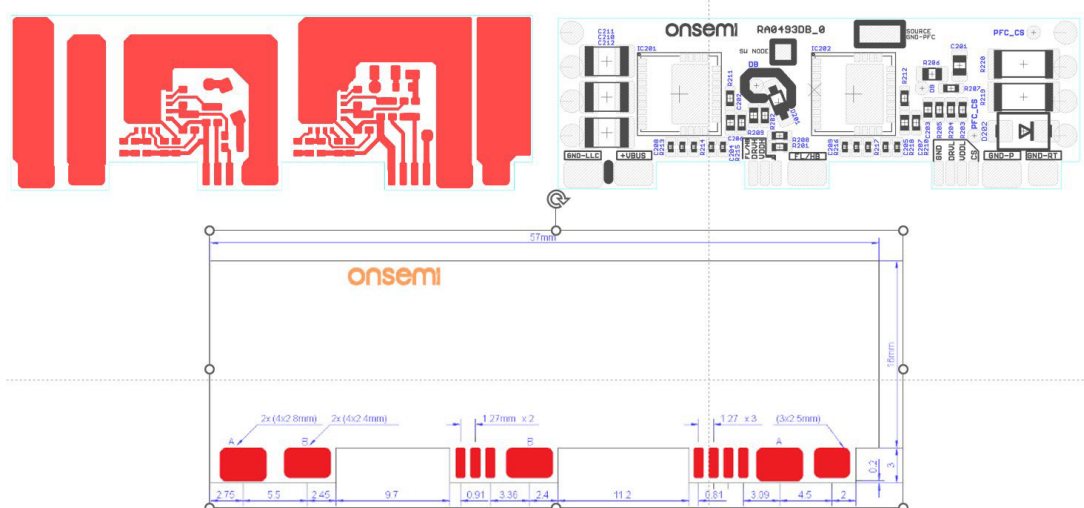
NCP58921 Based IMS HB Module – Top Copper Layer, Assembling Layer and PCB Dimensions
